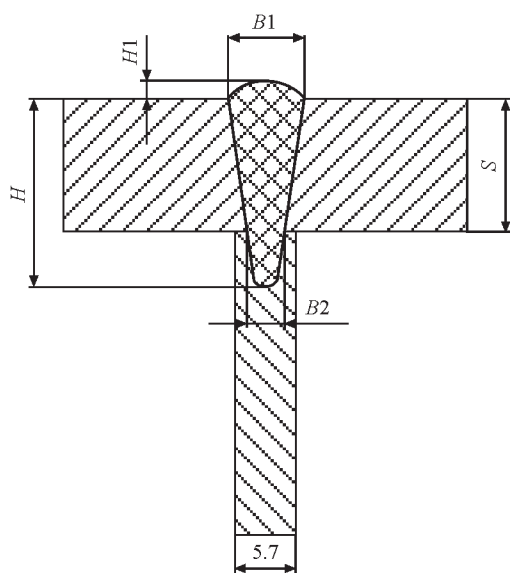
Scheme of T-joint of «disc-blade» type:  $H$  — weld depth;  $H1$  — height of weld reinforcement;  $S$  — thickness of covering disc;  $B1$  and  $B2$  — weld width in its upper part and in the contact plane of covering disc with blade, respectively
